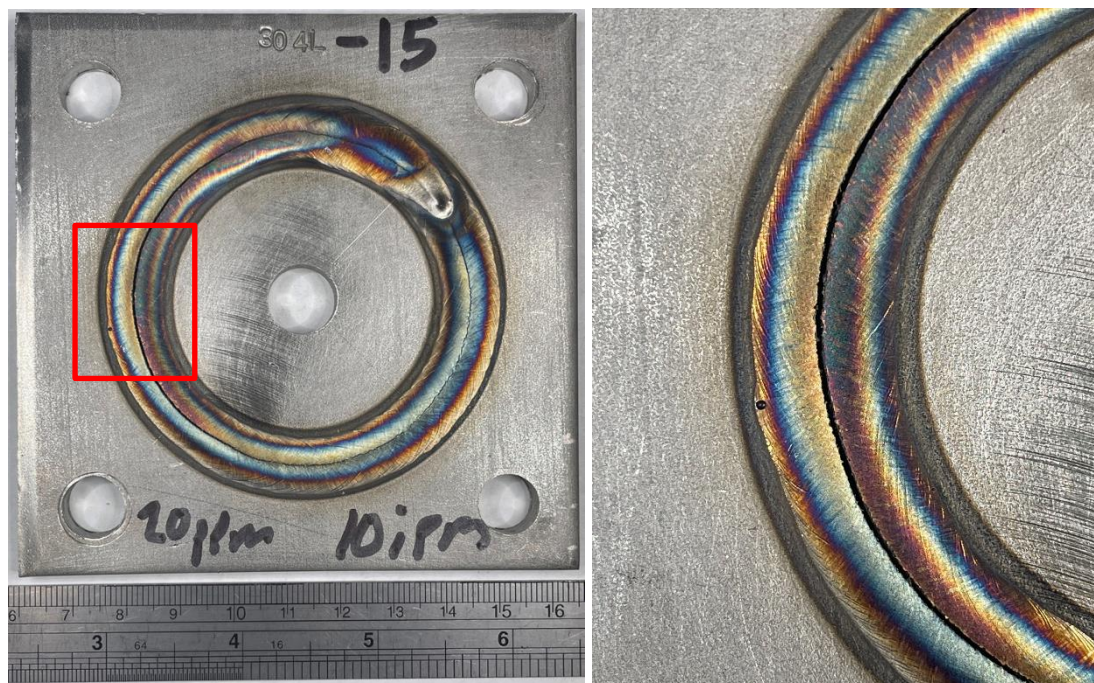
An example of the centerline solidification cracking after circular patch test using the Alloy 709 weld wire with <20 wppm-P on a 304L plate.
